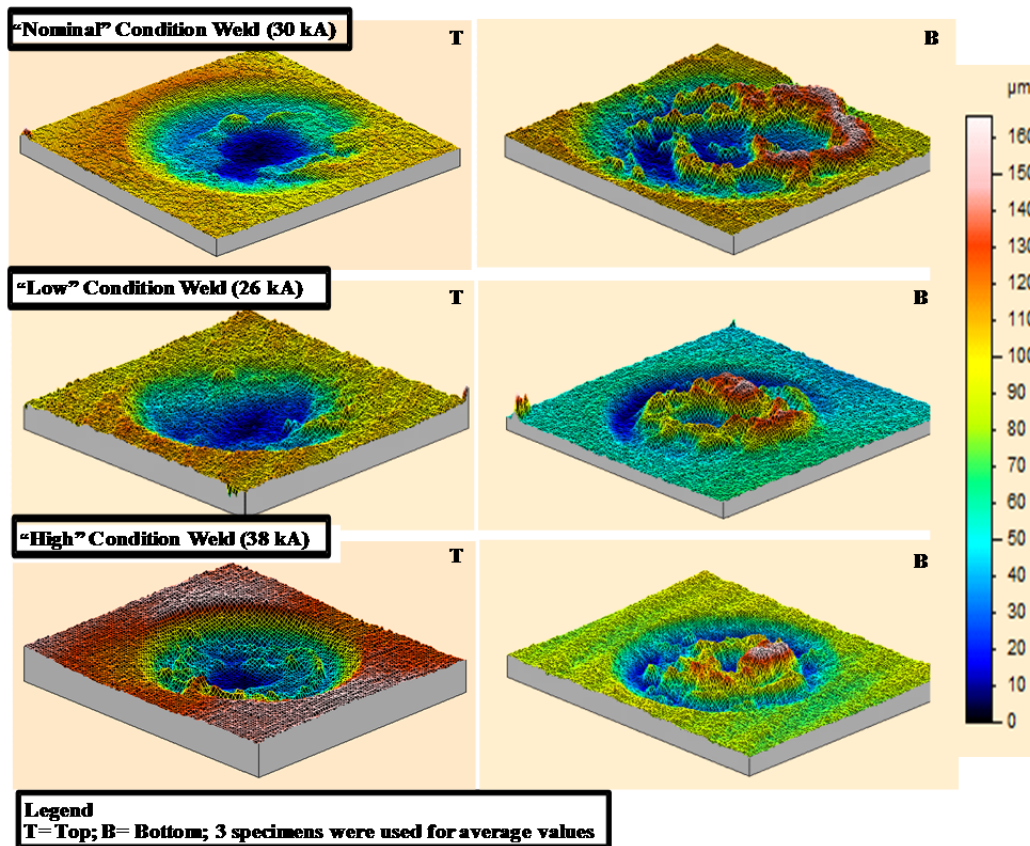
Axonometric 3D weld profiles for top and bottom welds at “nominal,” “low,” and “high” conditions.
